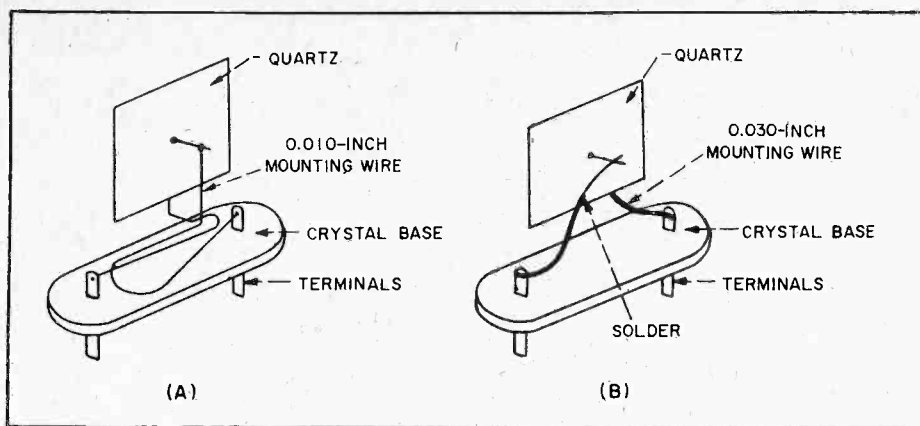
Conventional crystal mounting (A) has lower tolerance to vibration than more rigid mount (B) designed for vibration up to 500 cps
